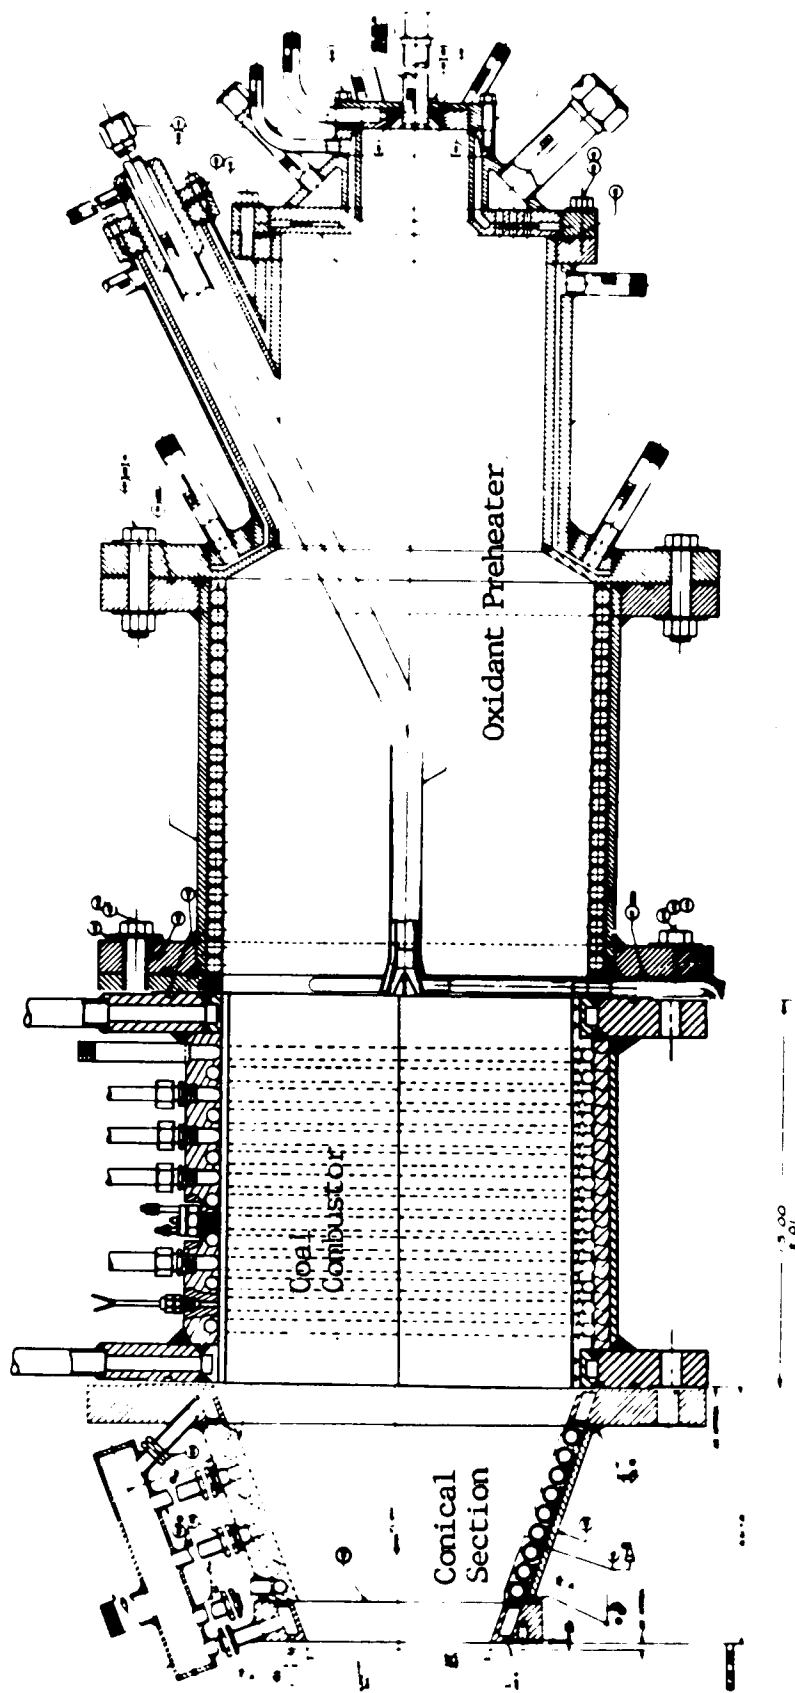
Oxidant Preheater/Coal Combustor Assembly.
